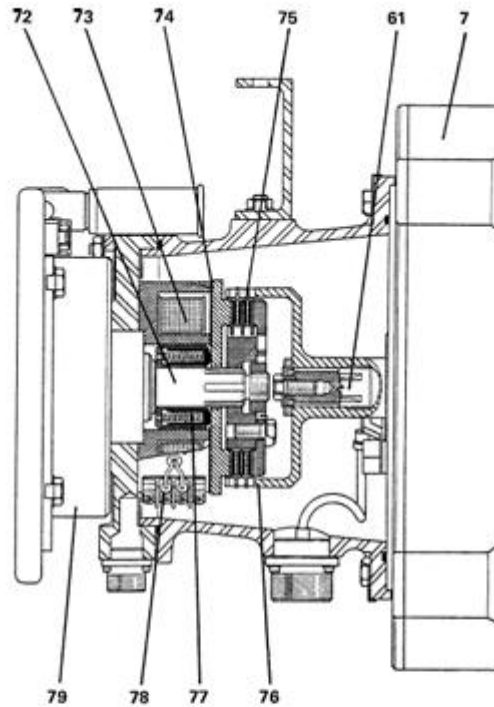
Reduction Gear Drive, Cutaway View
